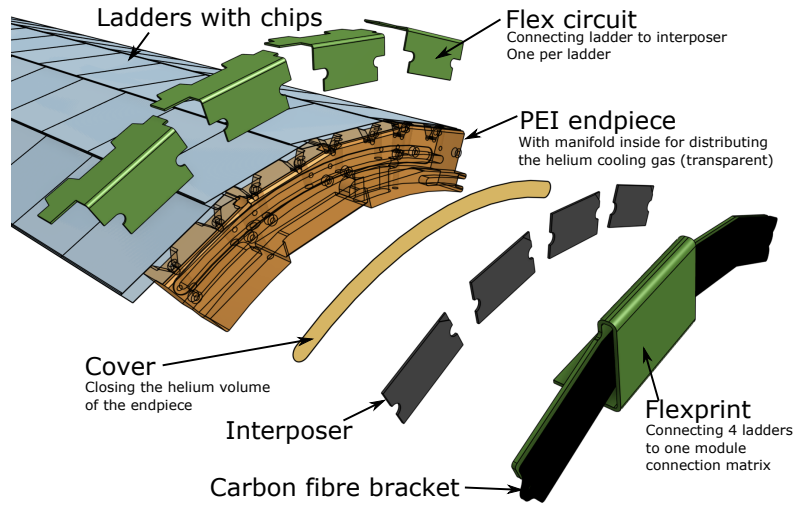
Exploded view of the outer layer module assembly. The end piece region provides a manifold for distributing the helium cooling gas and holds the flexible circuits to connect ladders to a single electrical connection matrix on the bottom.
